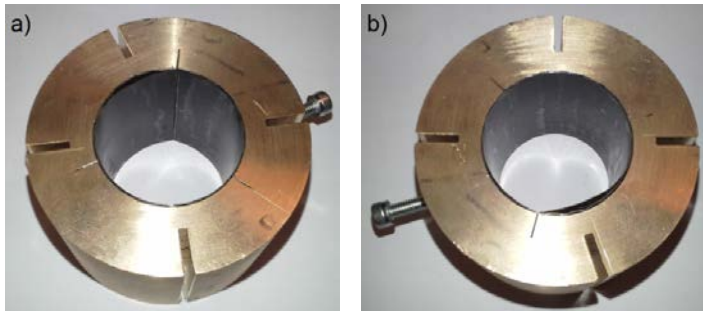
Photographs presenting an external surface of the top foil mounted in a tested bearing: a – upper part, b – lower part
